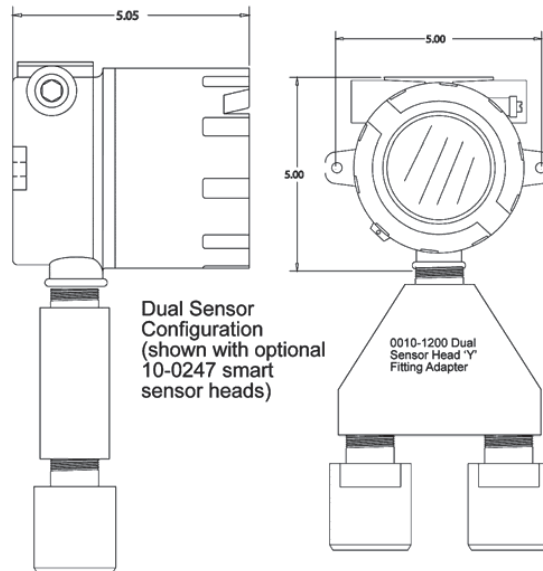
BFT-44 Explosion-Proof Housing with Dual Sensor Head Adaptor
